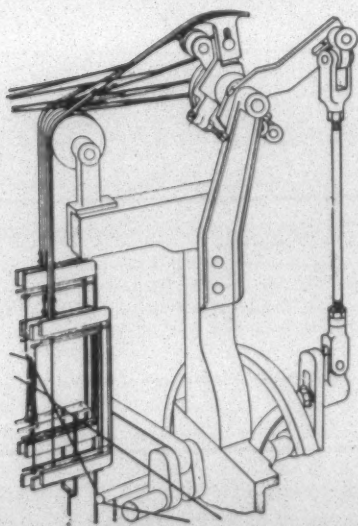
This drawing shows the jumper motion as applied to a cam loom.
